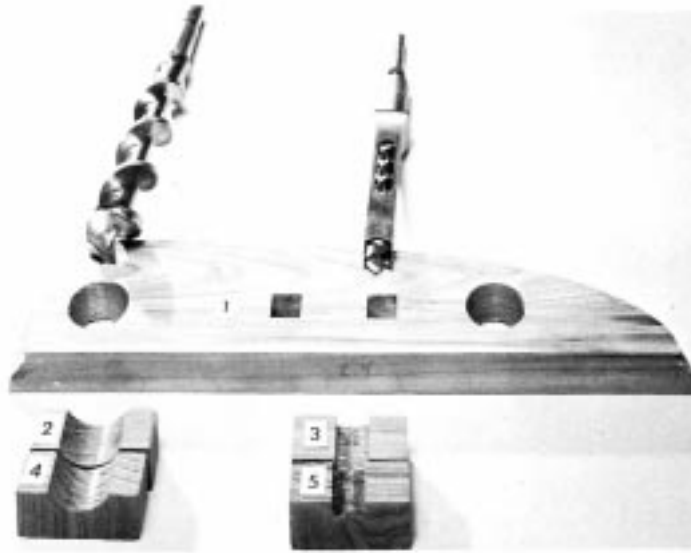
Type of Jig (Assembled) Used in Shaping Test
